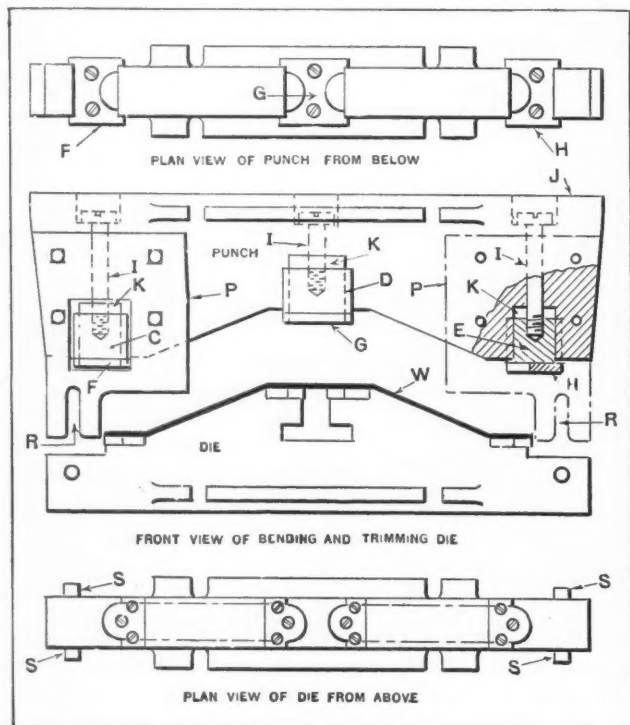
Upper and Lower Members of Bending and Trimming Die Shown in Fig. 2
